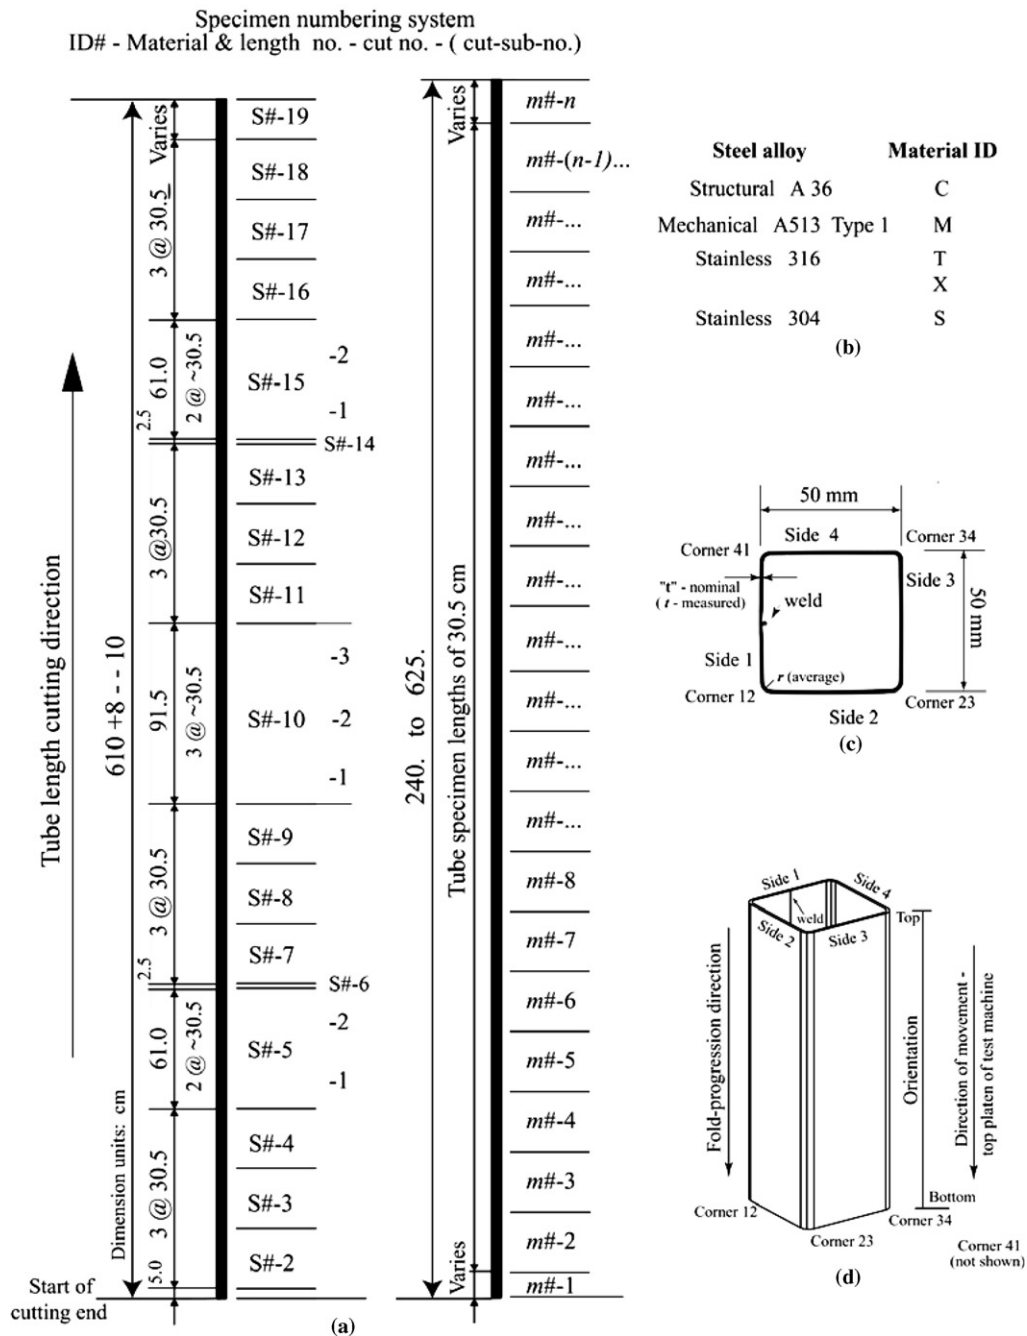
Commercially produced, welded square box cross-section tube lengths: (a) length cutting diagrams for 304SS lengths and lengths of an arbitrary material  $m$  with  $n$  pieces, (b) materials, (c) cross-section geometry – 304SS S1 example and (d) tube specimen orientation corner numbering system.
